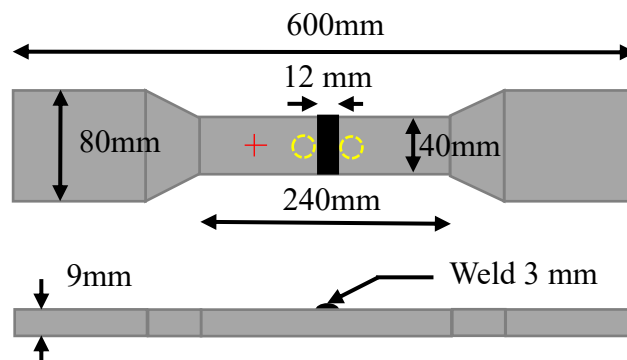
Top and side views of the tensile specimen with butt weld
